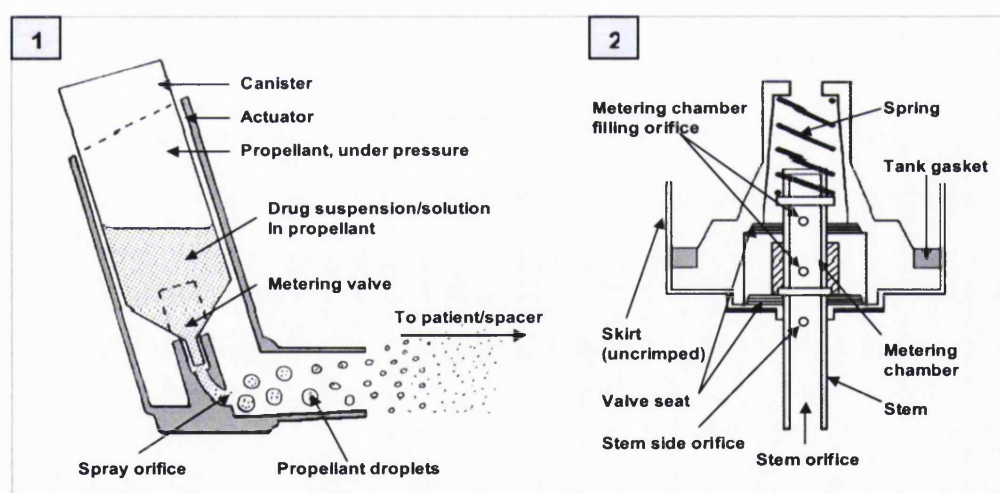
Schematic of (1) pMDI device and (2) metering valve design.
